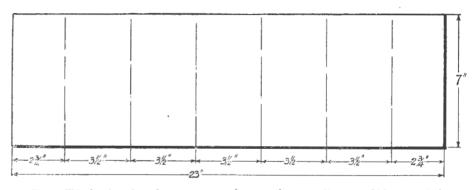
This drawing gives the measurements between the centre-lines on which most of the parts are mounted,
